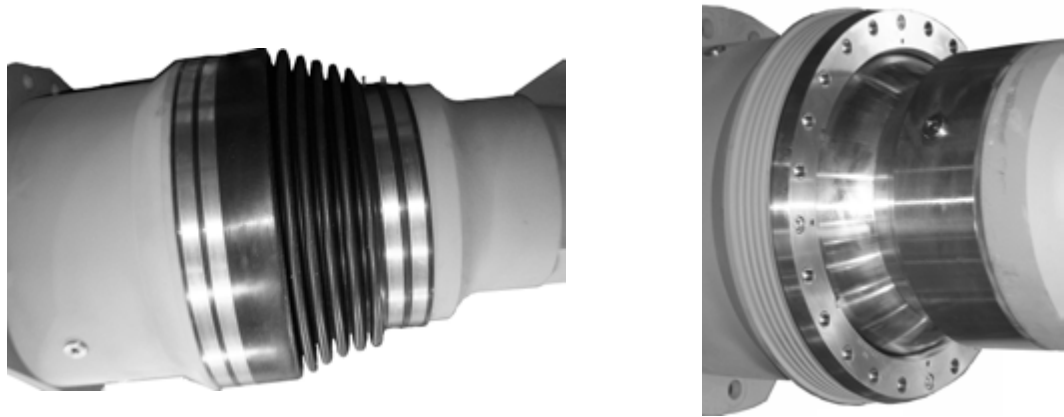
Remove All clamps (left), and Slide Boot Back Over Thrust Tube (right)
